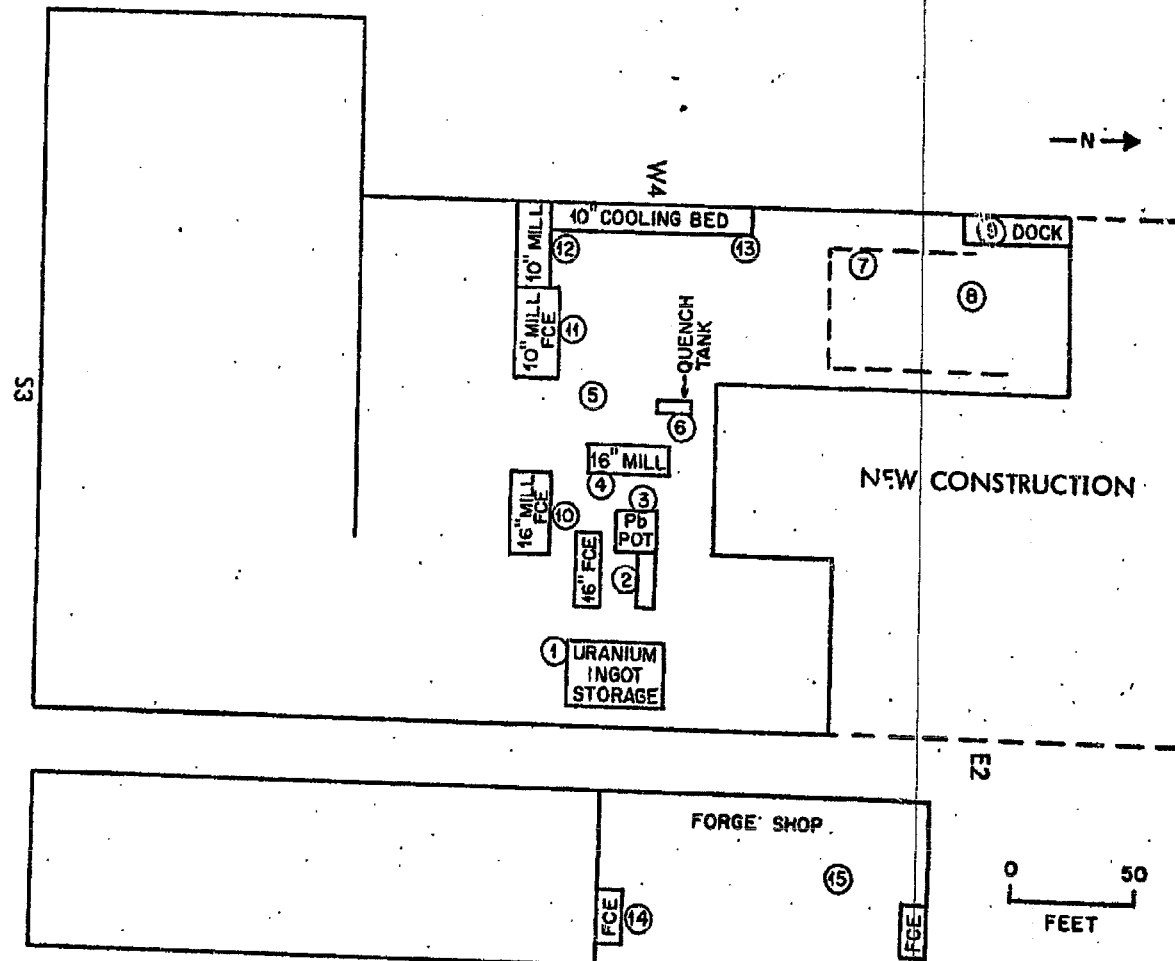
Plan view of the 16-in. roll mill and forge shop.
